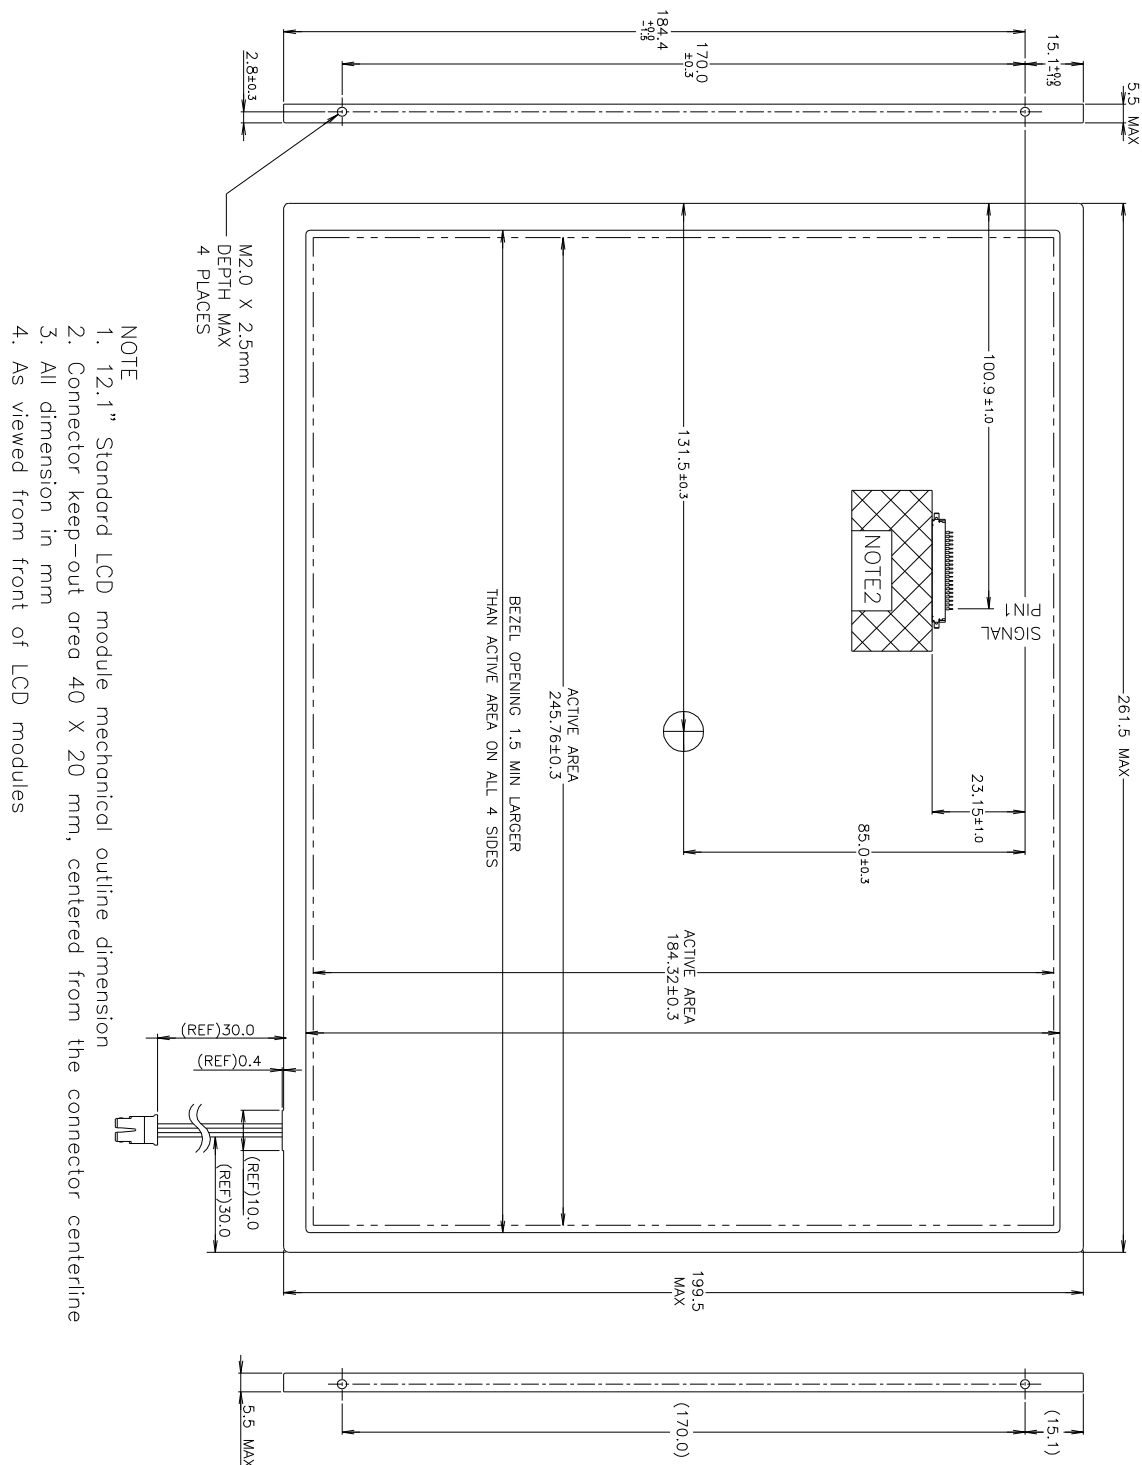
12.1-inch Standard Single CCFL Mechanical Outline Dimension (Front View)
